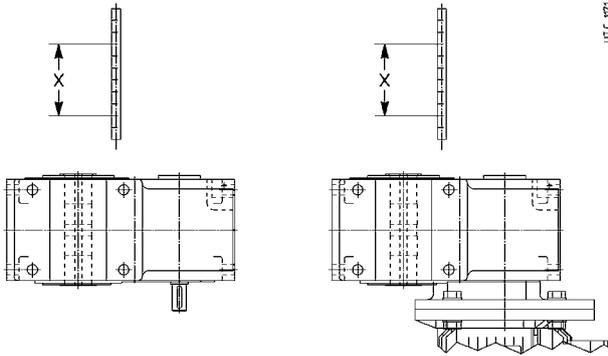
Position the helical gear reducer or gearmotor, mounting position V6 for oil level (quantity) measurement.
